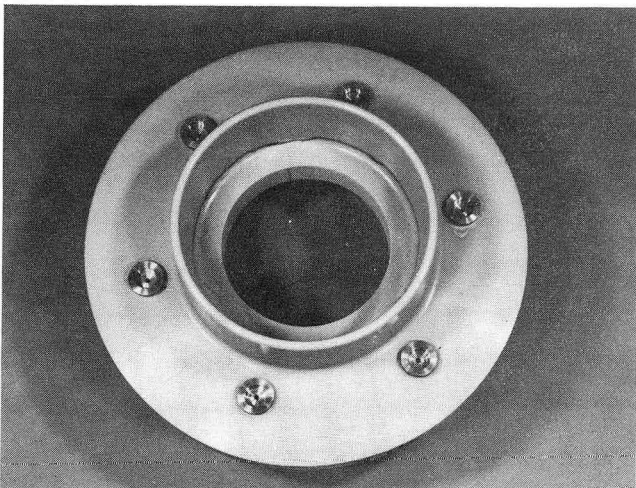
Pressure-Load Side of Insulator After Destructive Test CBB 855-3606
